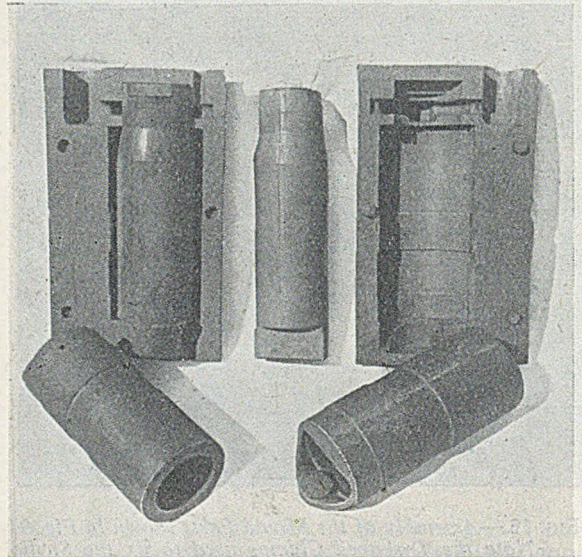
Two Liner Castings (foreground) and (rear) the Shell Mould Halves and Shell Core used for this Job. The Castings weigh 33 lb. each.
